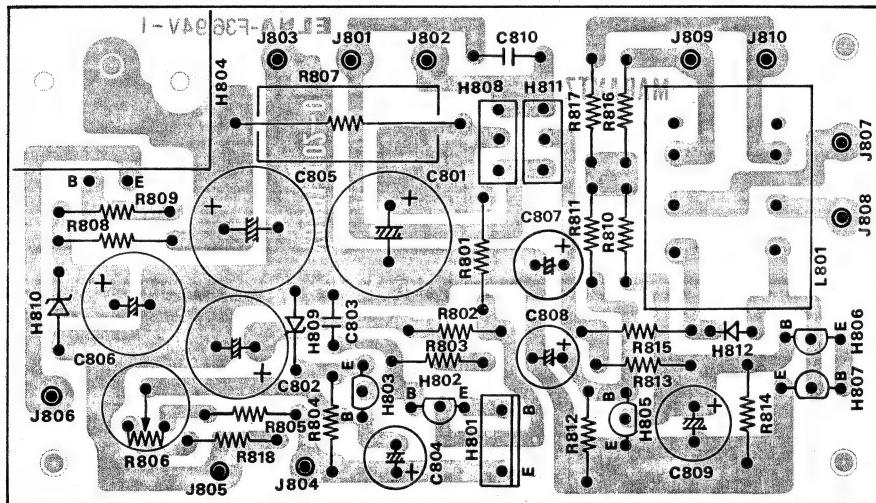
Power Supply Board – P800 Component Assembly Diagram
